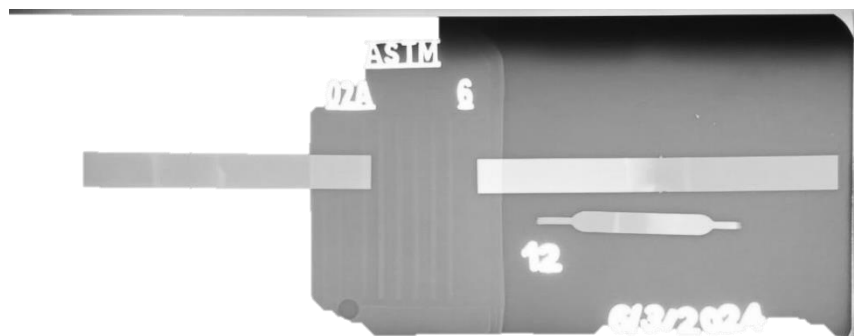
Radiographic inspection test for similar and dissimilar welds Al- alloy.
